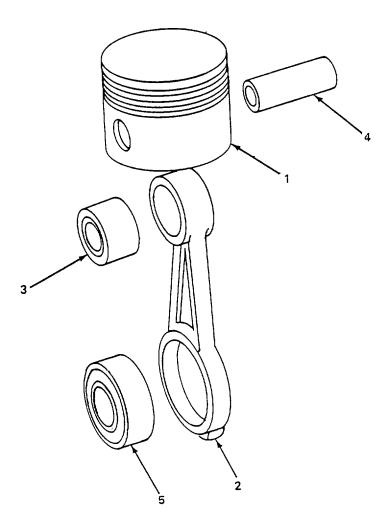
Third Stage Crosshead and Connecting Rod Assembly, Repair.
